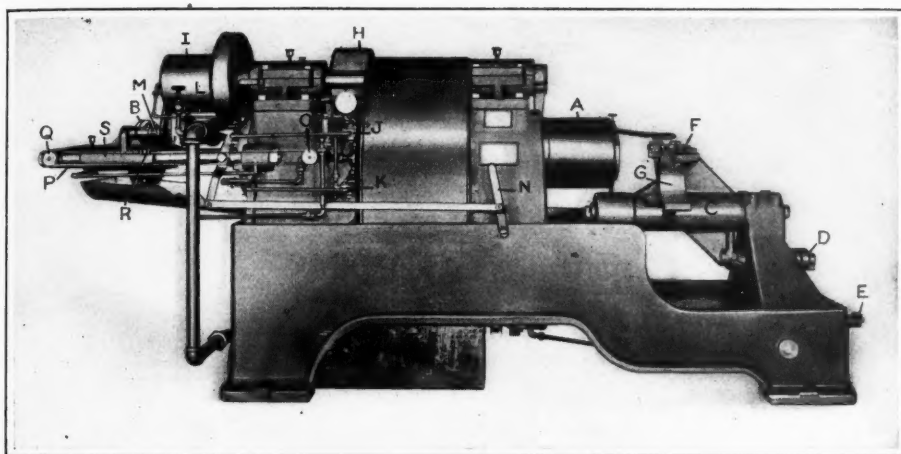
Front View of Warren Lathe for rough-turning Nose of 5-inch Shell Forgings
